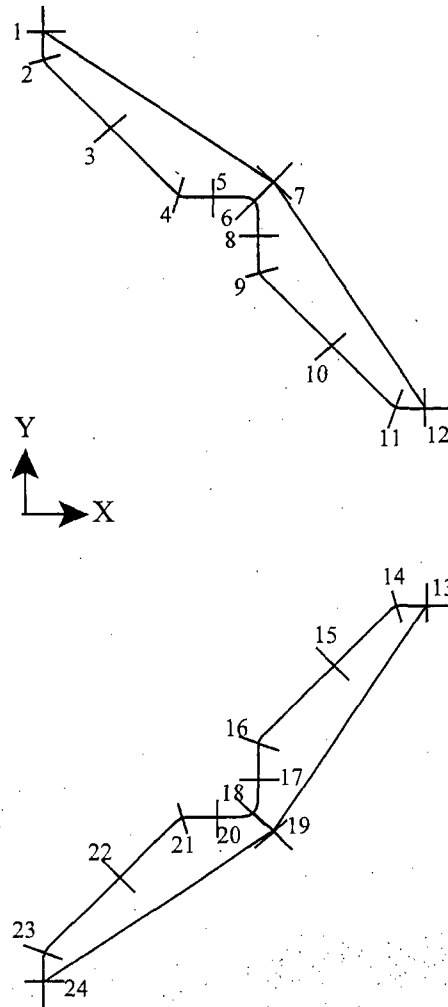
PWR Corner Support Weldment Section Cuts – 45° Basket Orientation
